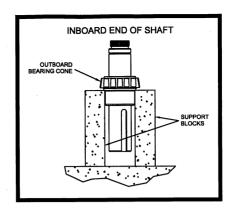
Removal of Outboard Bearing Cone (Option #1)
